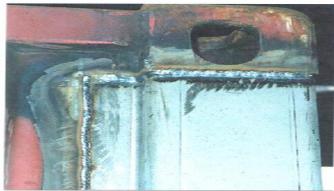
/ Detail of front corner post welding adjacent to corner fitting
